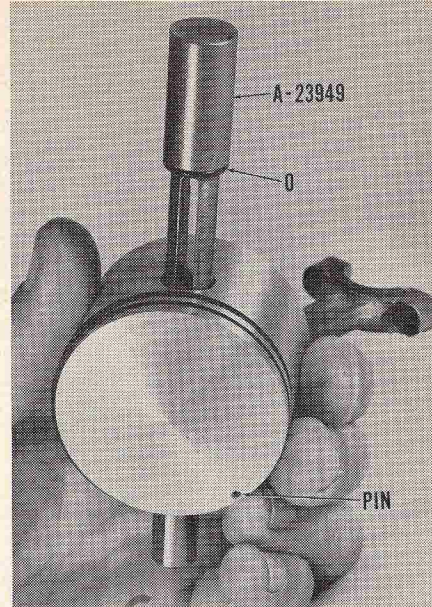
Homelite tool No. A-23949 is used to push piston pin from connecting rod and piston. Note "O" ring (O) which protects piston from damage by tool. Note piston ring retaining pin.
